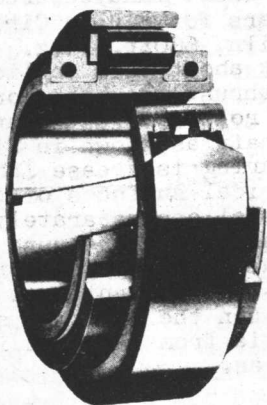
Expansion EX. Bearings for radial loads only. The inner race and shaft have axial freedom
